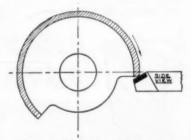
Sketch illustrating the "shear" cut obtained with the newer negative rake Carboloy tools now widely used on machining large work with interrupted cuts. Note that impact load is decreased and also is not concentrated on point of tool.
